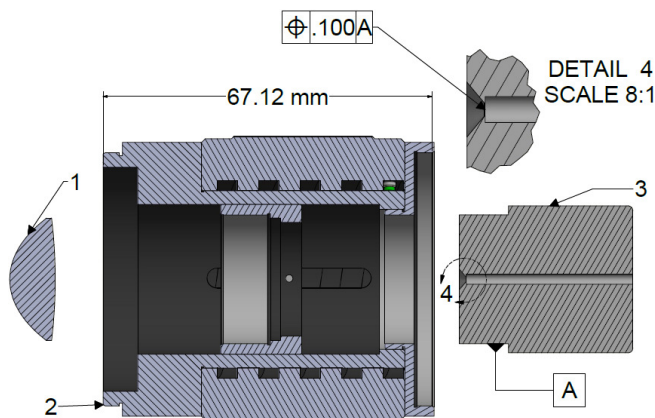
Exploded cross-section of the final coupler design. A focusing lens (1) is inserted into an adjustable lens tube (2), which is connected to the custom mounting component (3). The FAS algorithm is used to tolerance the centration of the custom mounting component (4).
